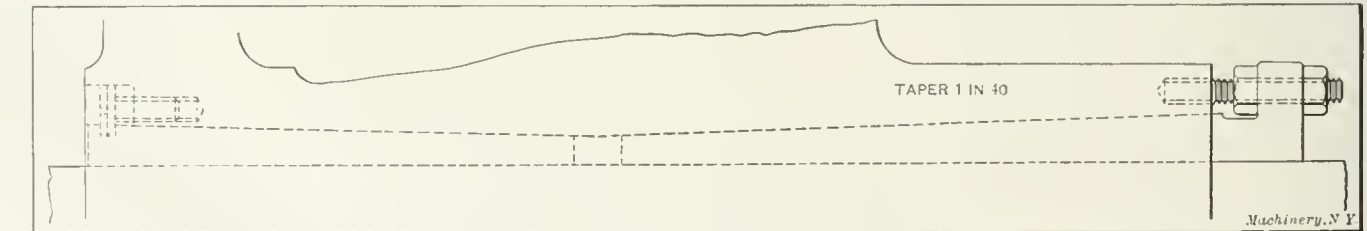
Arrangement of Gibs on a Multiple-spindle Drilling Machine
